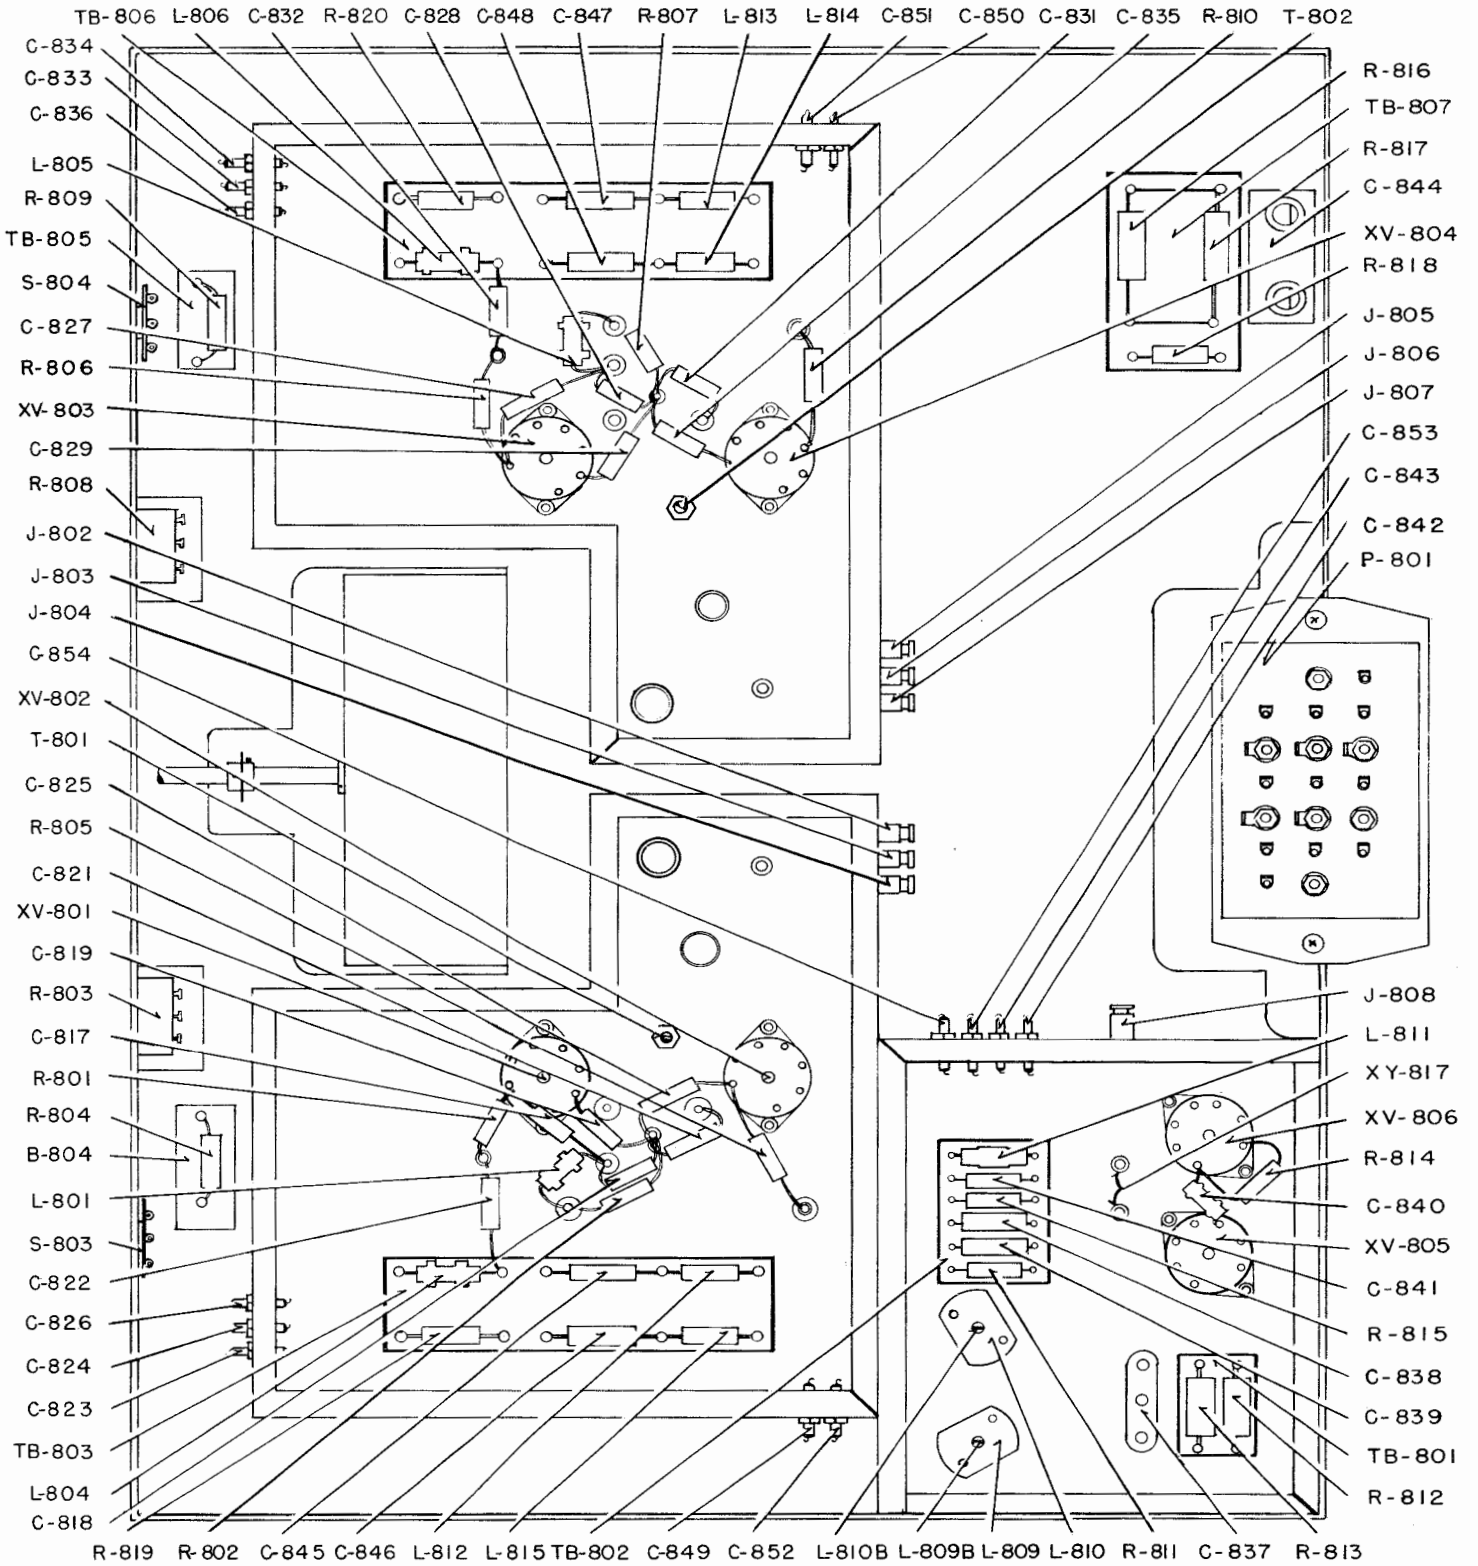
Component Locations Bottom of Chassis, Oscillator Assembly O-131/FRR-24
